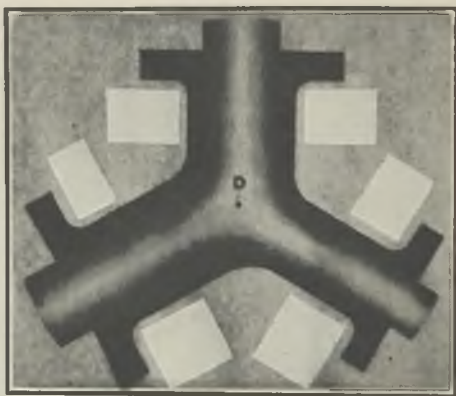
METHOD OF DEALING WITH A FLANGED CASTING.
